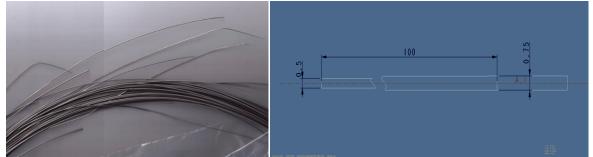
Welded mandrel particular (left); drawing of a tapered mandrel (right)
